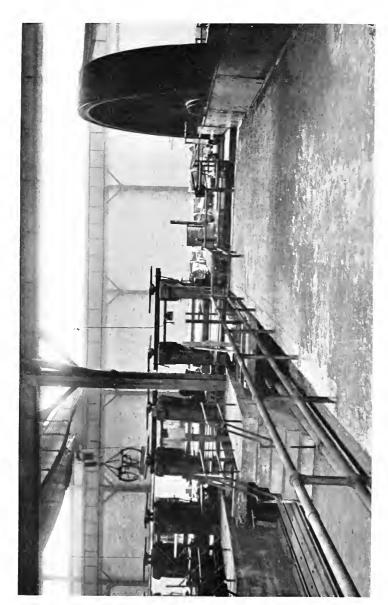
Fig. I. — Guards around pit and rope drive gear. Cold rolls. (Courtesy of American Sheet and Tin Plate Company.)
